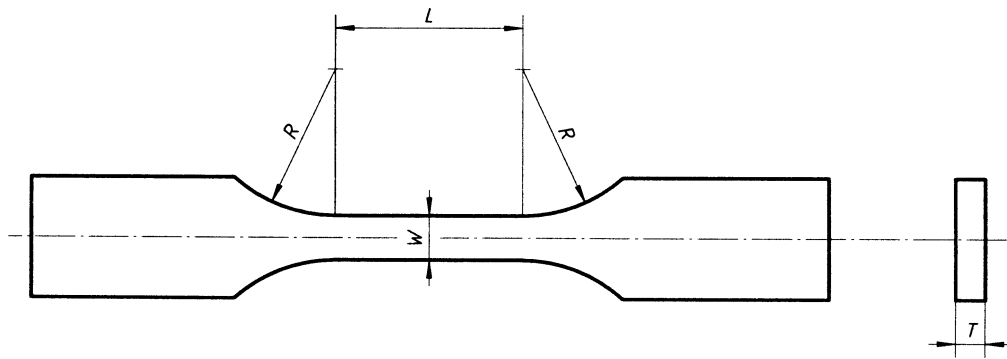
Specimens with tangentially blending fillets between the uniform test section and the ends
